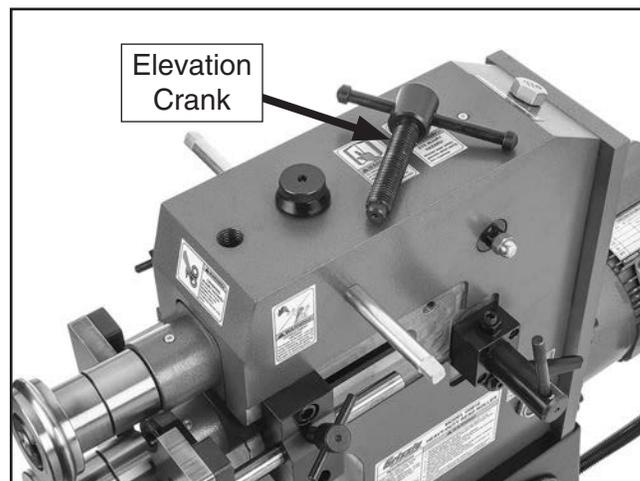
Upper mandrel elevation crank removed for cleaning/lubrication.
